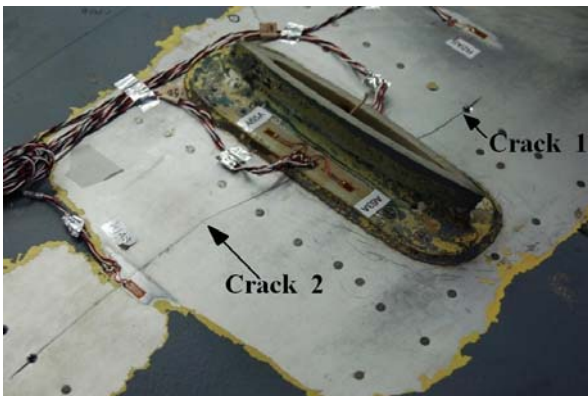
ST-016 flaw cracks 1 and 2 mechanical extensions at 4,700 cycles
